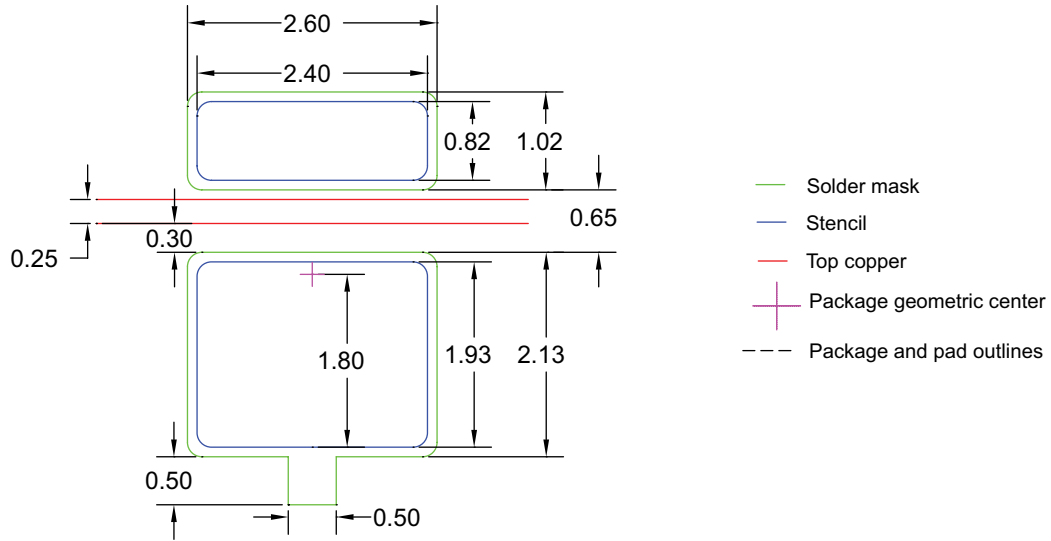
Recommended PCB solder pad layout for LUXEON 3535L with CrispColor Technology.
